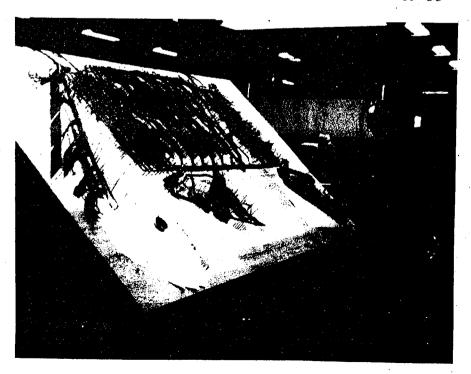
Cable making on a large table. Note improved low-luminance lighting introduced after 1980
